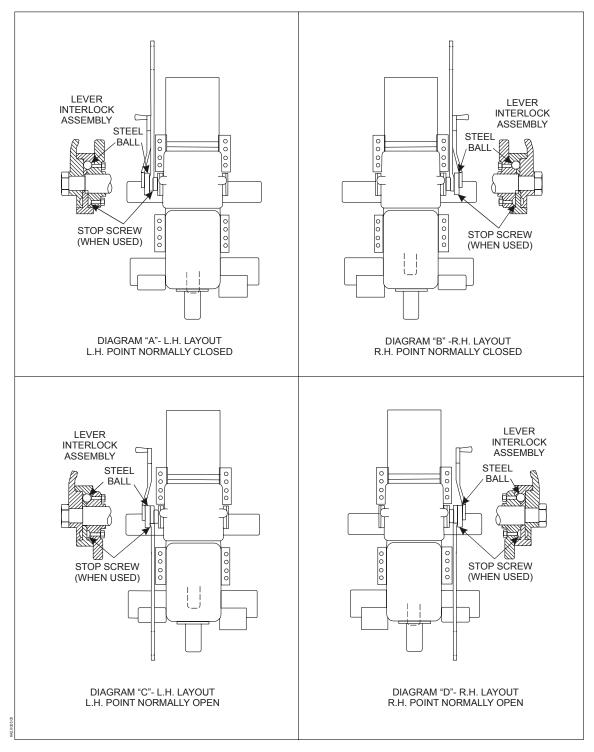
Standard Lever Interlock Assemblies for M-23A and M-23B Switch Machines
